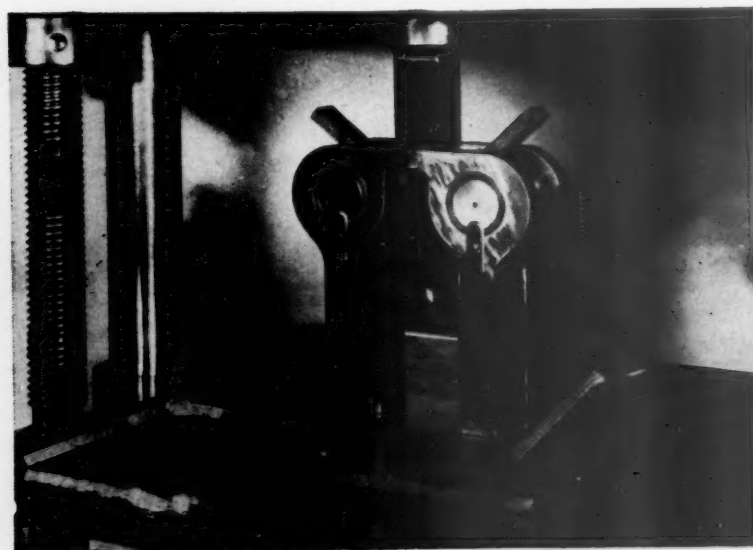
T-BEND TEST FOR WELDABILITY.
